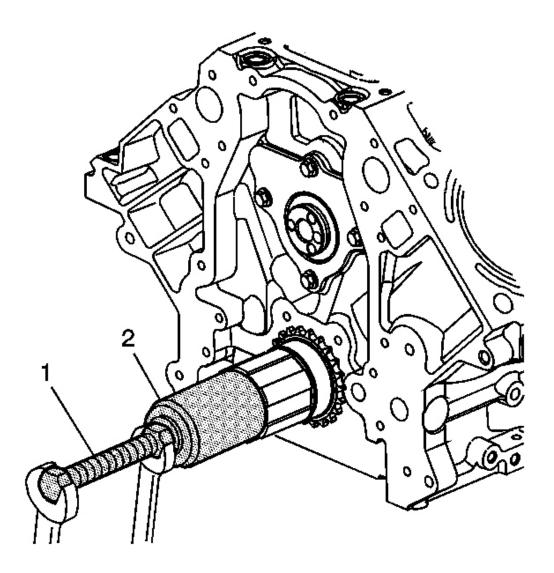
Installing Crankshaft Sprocket Courtesy of GENERAL MOTORS CORP.
